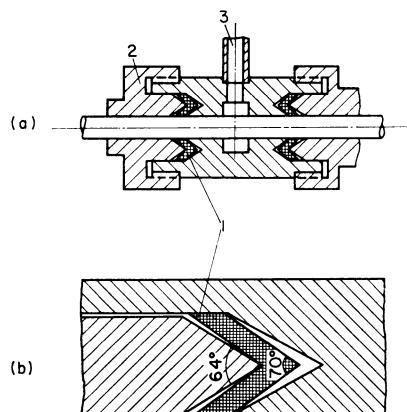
Sliding shaft seal with V-shaped Teflon gasket and guard vacuum. After Champeix²⁰³ (*Courtesy of Société Française des Ingénieurs et Techniciens du Vide*)
